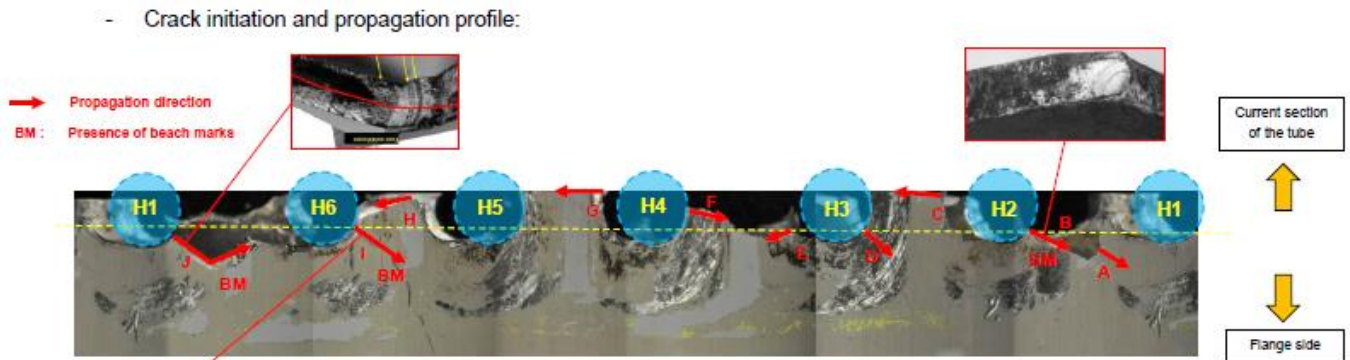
Fractures and surface of fractures in the shaft. Source: Airbus Helicopters
